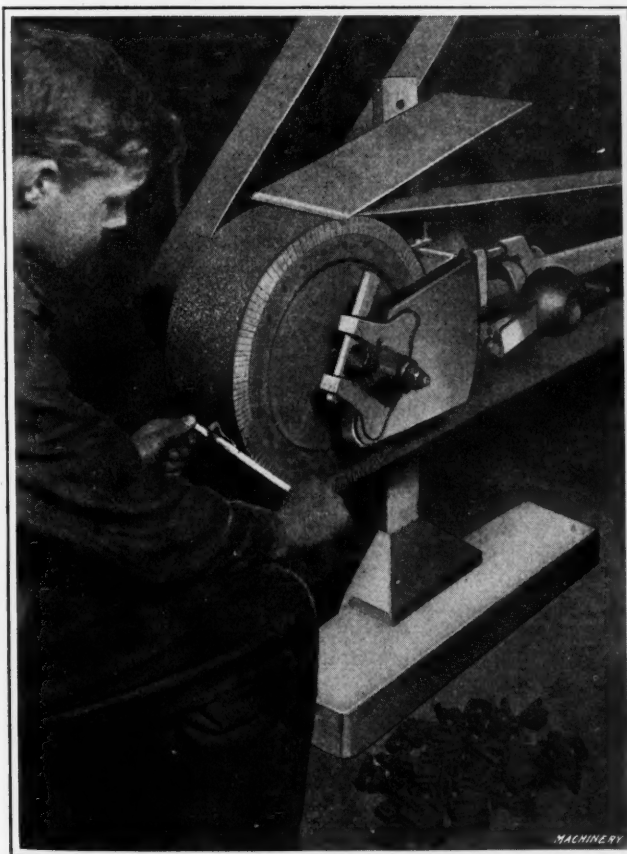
Close View of Polishing Operation performed on a Machine of the Type shown in Fig. 10
